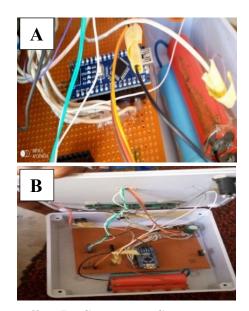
A - Fixing of Microcontroller. B - Connecting Components to the Microcontroller
